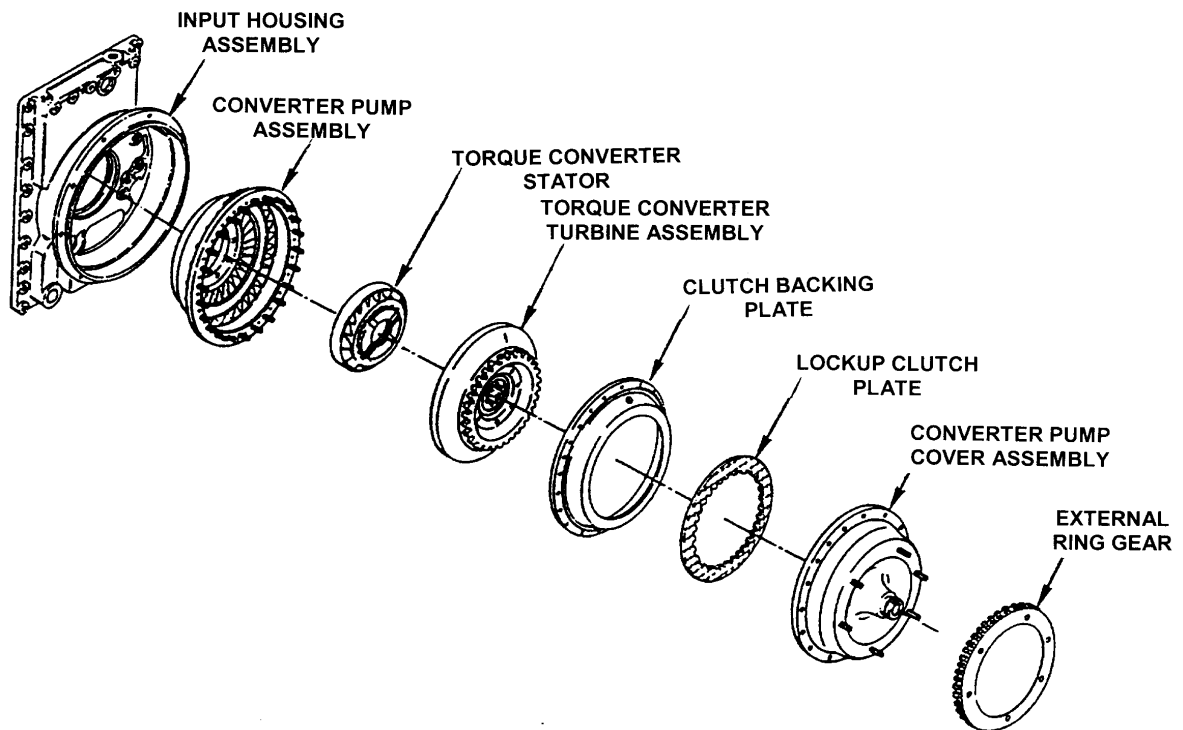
Input Housing and Exploded View of Major Components of the Torque Converter.
